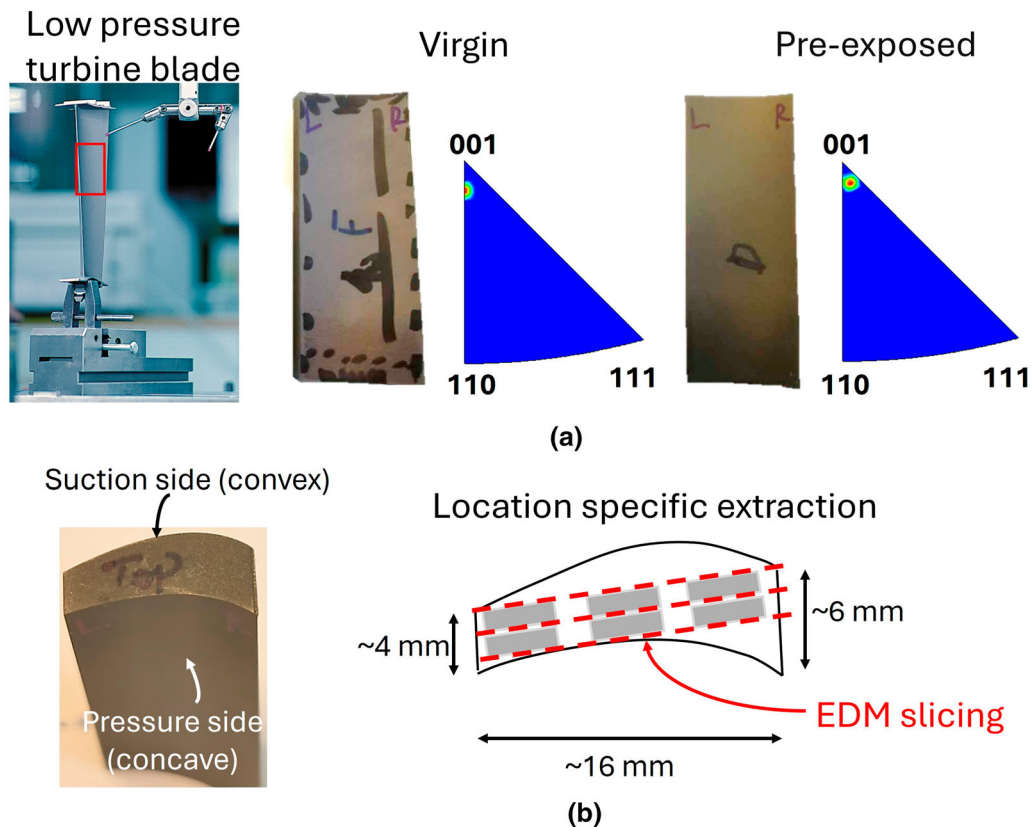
(a) Photo of an example low pressure turbine blade and side view of blade section prior to final machining of miniaturized tests for virgin condition and after complex thermal mechanical exposure. Corresponding stereographic triangle showing alignment to 001 orientation. (b) Top view of the blade section prior to machining and electrical discharge machining plan showing the location specific extraction of specimens.
